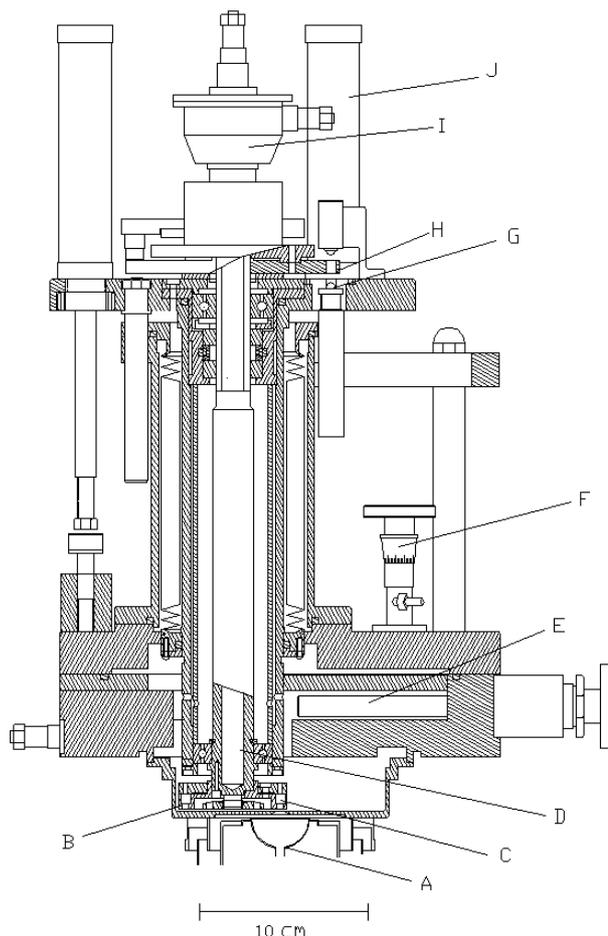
Schematic side view of the SMCAMS multi-cathode device. A: Ionizer; B: Cathode wheel; C: Sample holder (-17.5 kV); D: Rotary shaft; E: Gate valve; F: Pinhole valve; G: Positioning bolt; H: Ratchet wheel; J: Gas cylinder; I: Coolant head
